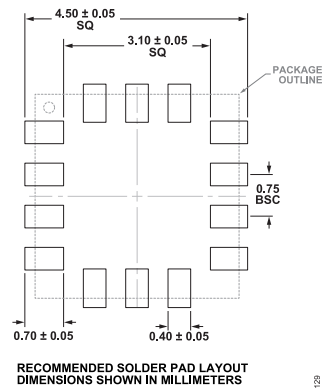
PCB Footprint Pattern and Dimensions in Millimeters
